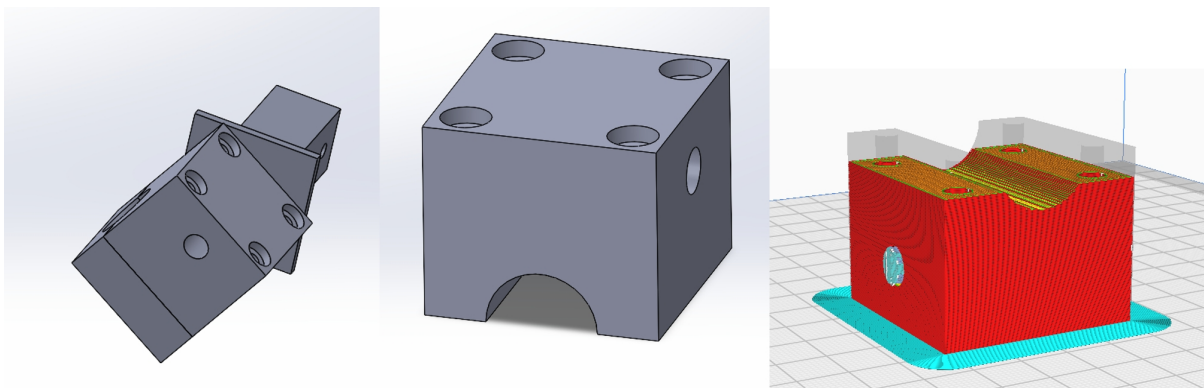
Final assembly and detail with SolidWorks. Print simulation with Ender Software.
